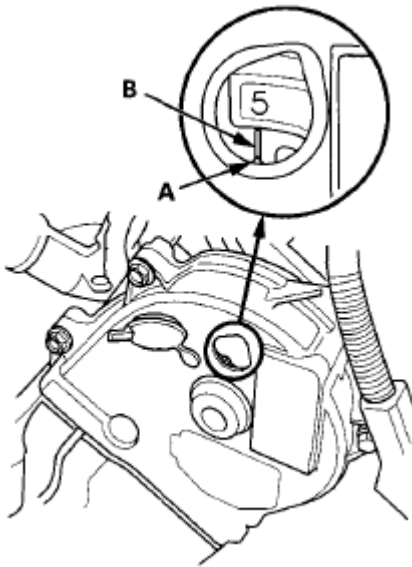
Identifying Pointer And TDC Mark On Piston No. 5
